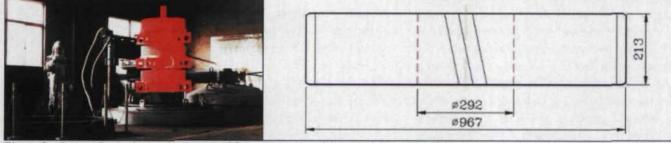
Just carburized gears are removed from conventional furnace before quenching. Each gear has 73 teeth, each one 213 mm long, a module of 12, an outside diameter of 967 mm and is made of SCM420H, a JIS material specification. Hardness of carburized teeth is HRC 58~59, case depth is 3.5 mm.
